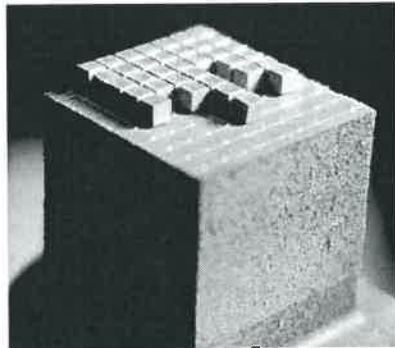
A part after shock testing on the drop table shows that several rows of smaller dimension blades sheared and rows with larger dimension blades remained intact.
